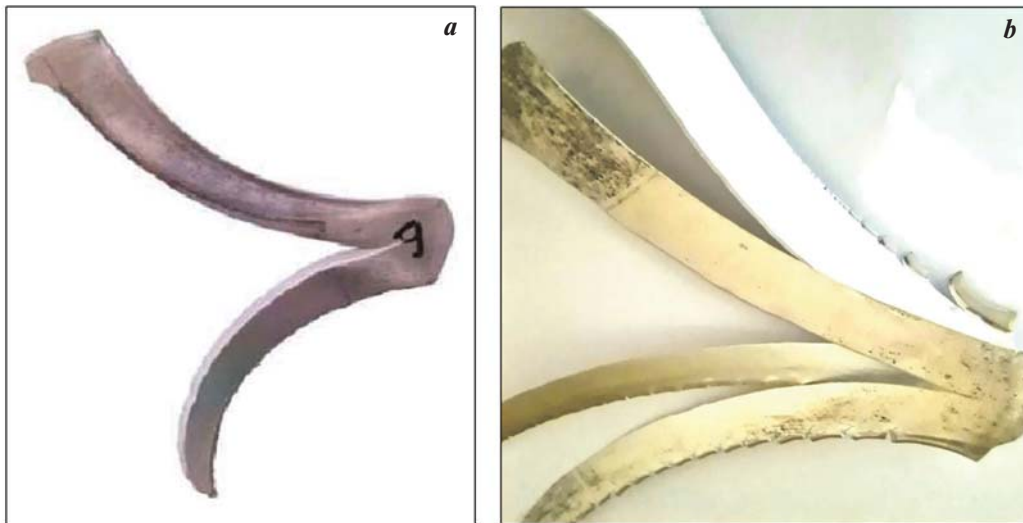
Workpieces after symmetrical thin-sheet rolling (a) and accumulative (b) roll bonding
